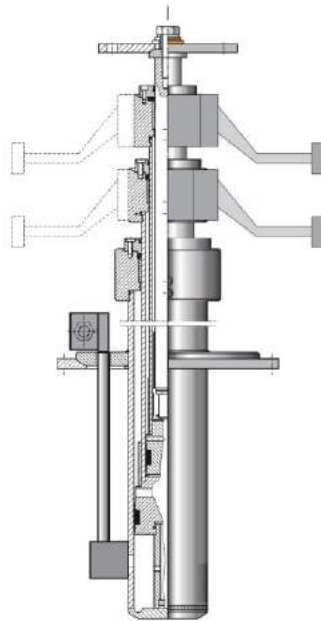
Telescopic cylinder with fastening plates for guide arms.
